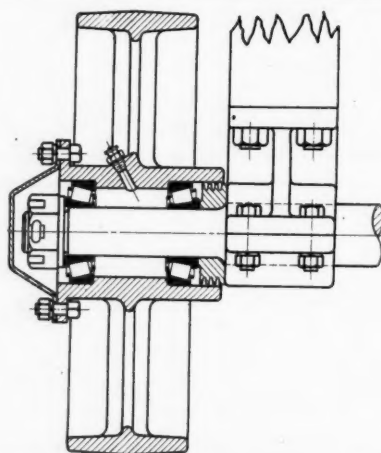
Wheel Bearing for Industrial Trucks with Fixed Axle
